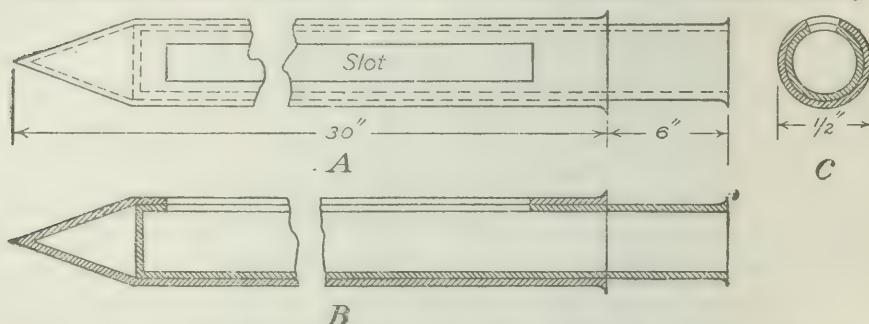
Sections of sampling device (not drawn to scale). A. Longitudinal section, showing slot; B, longitudinal section, samples turned 90° from position A; C, cross section through slot.
